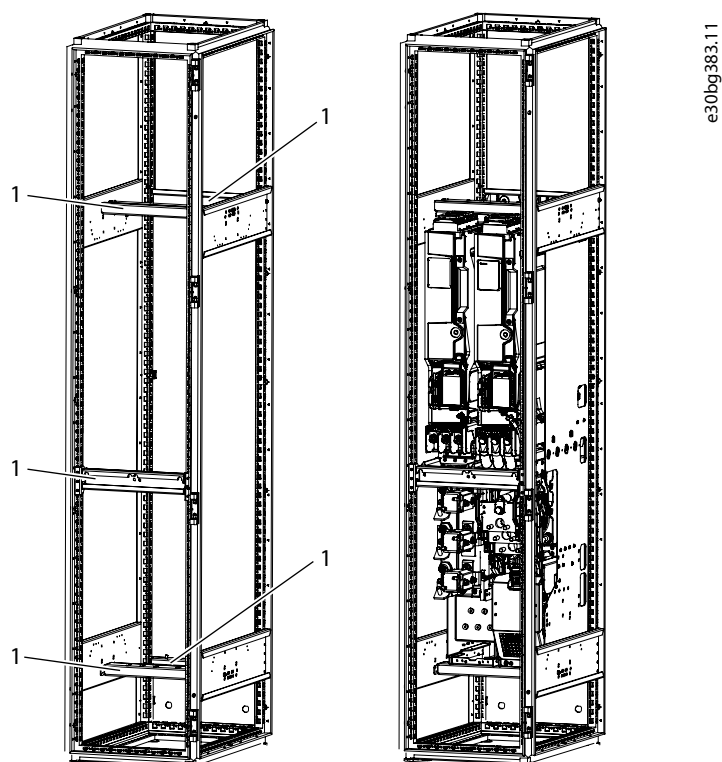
The Mounting Brackets and the Installation of System Modules with the Integration Unit into the Cabinet
